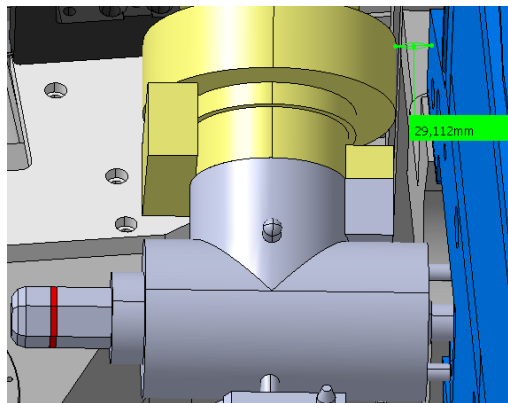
Clearances from WHMAN to SC when the pin tool is fully inserted
